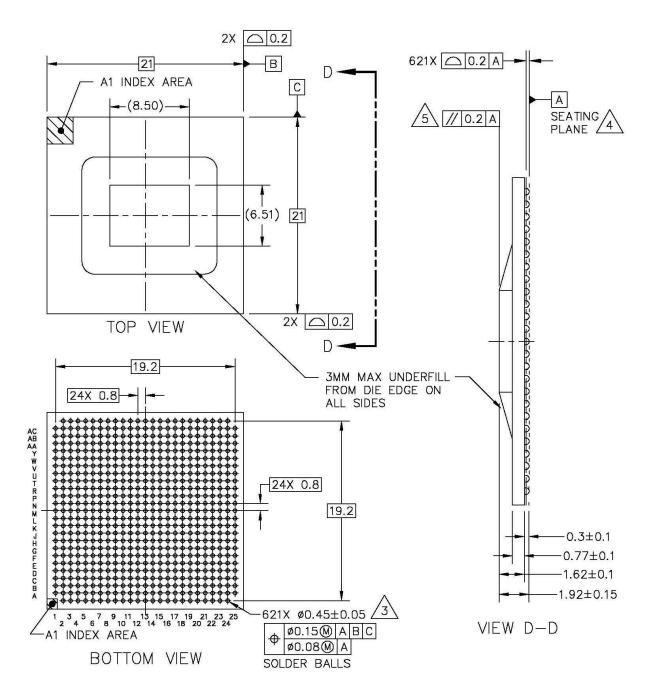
Mechanical dimensions of the FC-PBGA 21x21 mm (621 balls)
